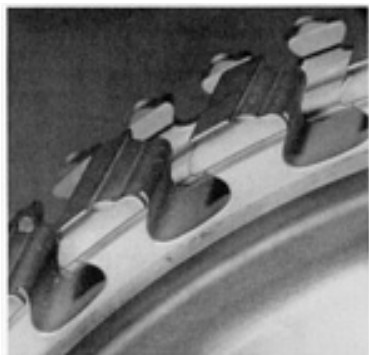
Front-stage HPC rotor disk showing dovetail disk slots and pressure faces
